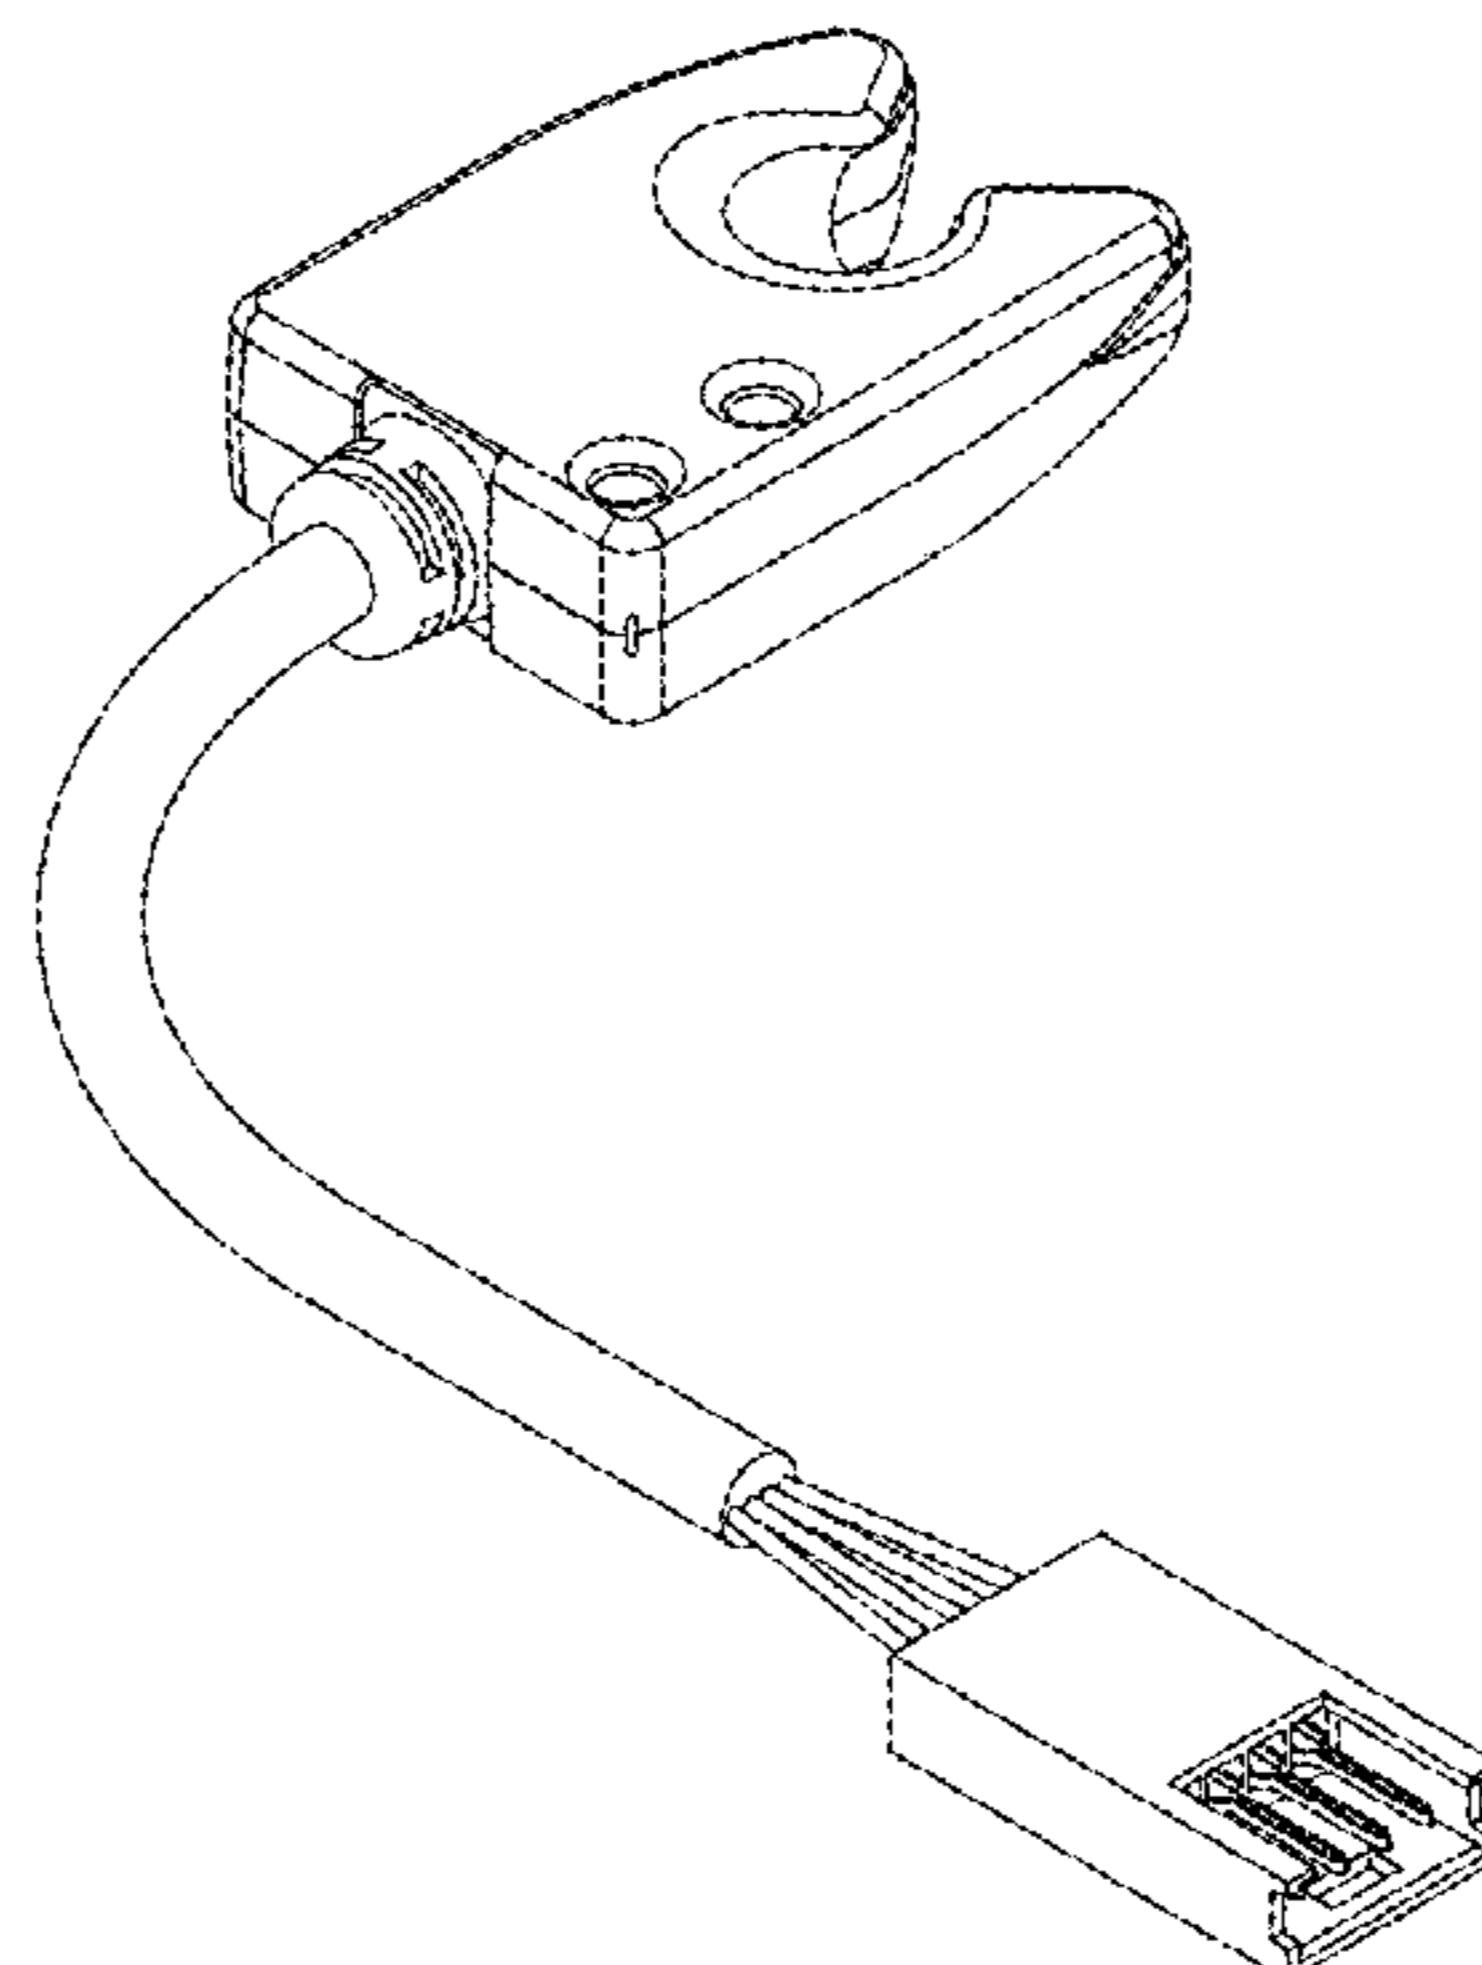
is a perspective view of the textile thread control sensor for automatic textile, knitting, or sewing machines; fig. 1.2 is a front view thereof; fig. 1.3 is a right view thereof; fig. 1.4 is a back view thereof; fig. 1.5 is a left view thereof; fig. 1.6 is a bottom view thereof; fig. 1.7 is a top view thereof.
